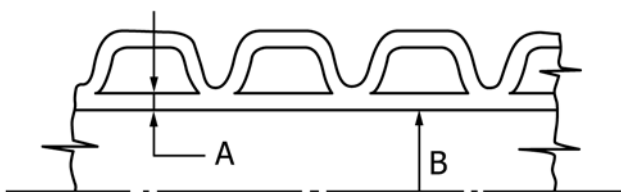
Typical Dual Wall Corrugated Profile (DWCP)
